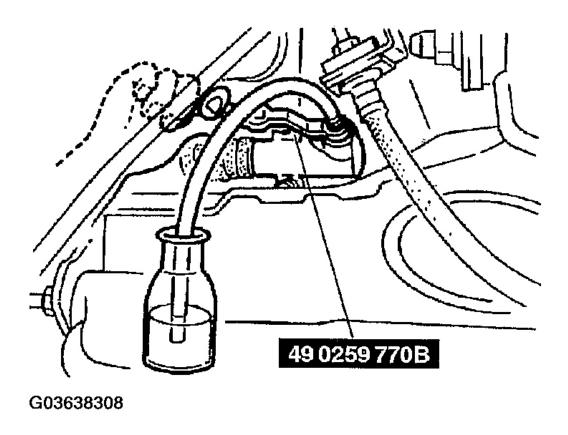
Tightening Bleeder Screw Using SST Courtesy of MAZDA MOTORS CORP.
